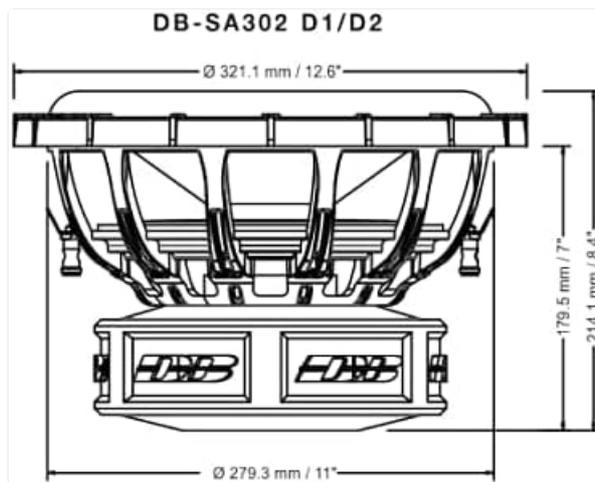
Technical drawing illustrating the dimensions of the DB-SA302 D1/D2 subwoofer, including diameter and mounting depth.
